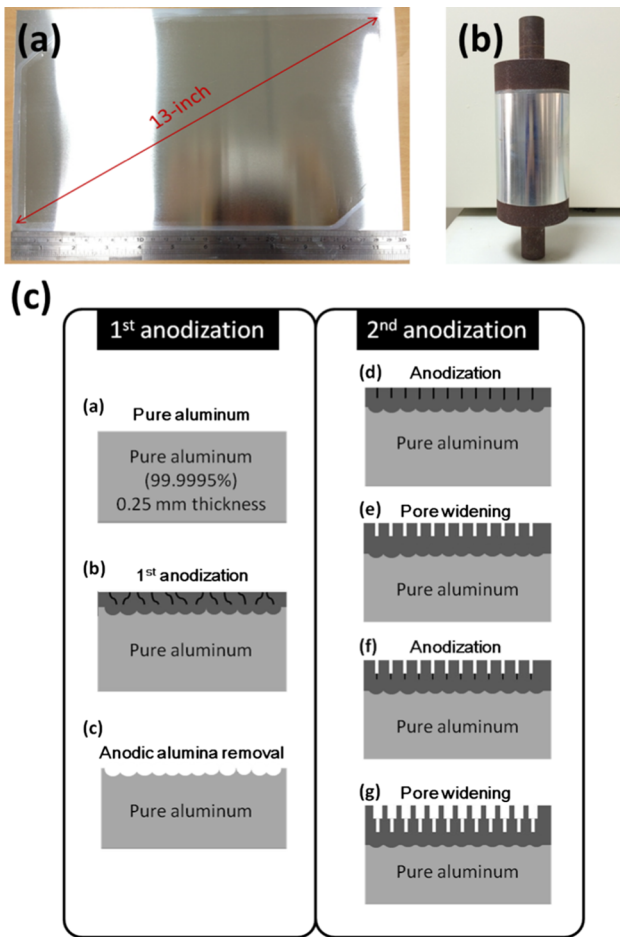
a Large area AAO mold using high purity aluminum foil. b AAO mold wrapped around roller. c Two step anodizing process for fabrication of AAO mold
